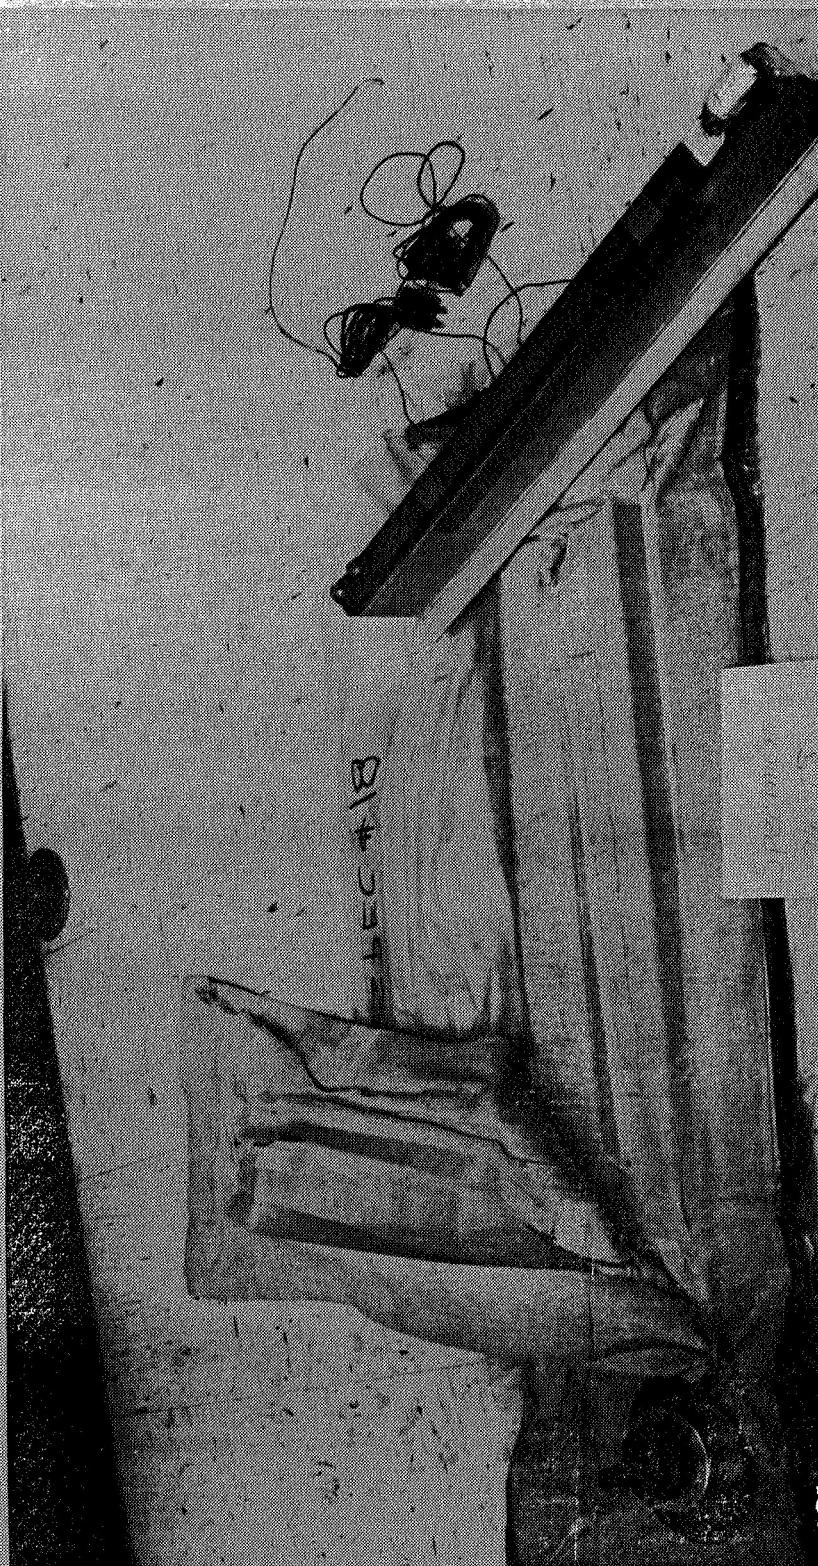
REINFORCED ZEE STIFFENER SPECIMEN
